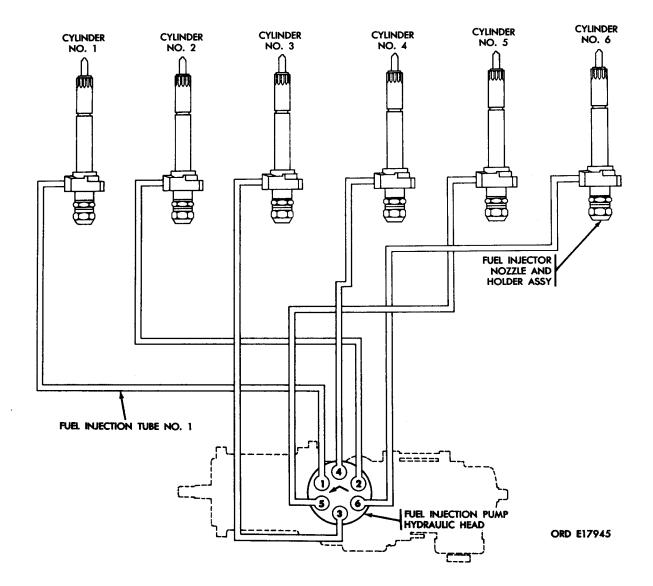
FUEL INJECTION TUBE AND INJECTION PORT IDENTIFICATION.
